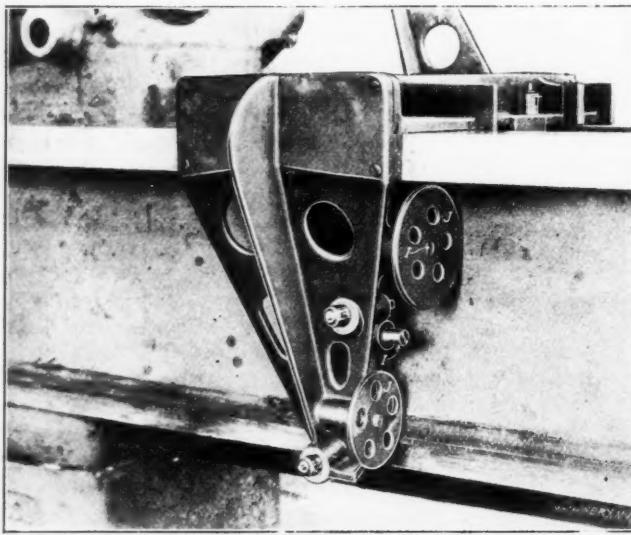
Testing the Bed for Clearance for Revolving Parts in the Apron.
